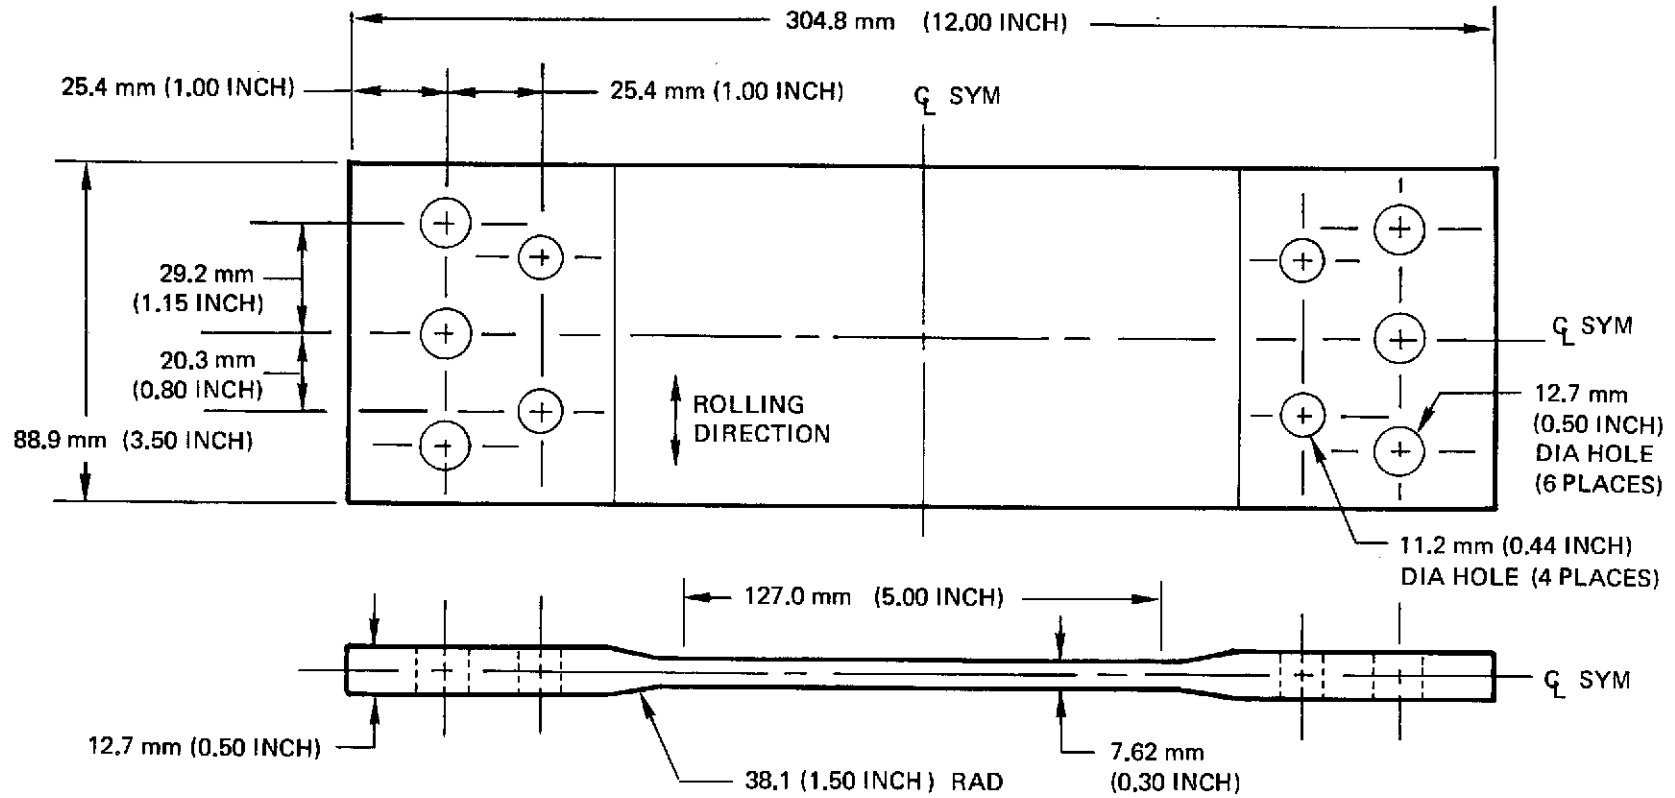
7.62 mm (0.300 INCH) THICK 2219-T87 ALUMINUM ALLOY BASE METAL SPECIMEN
